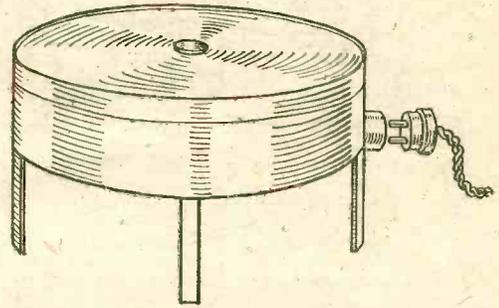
Electrically heated soldering pot showing central hole to accommodate spigot.
